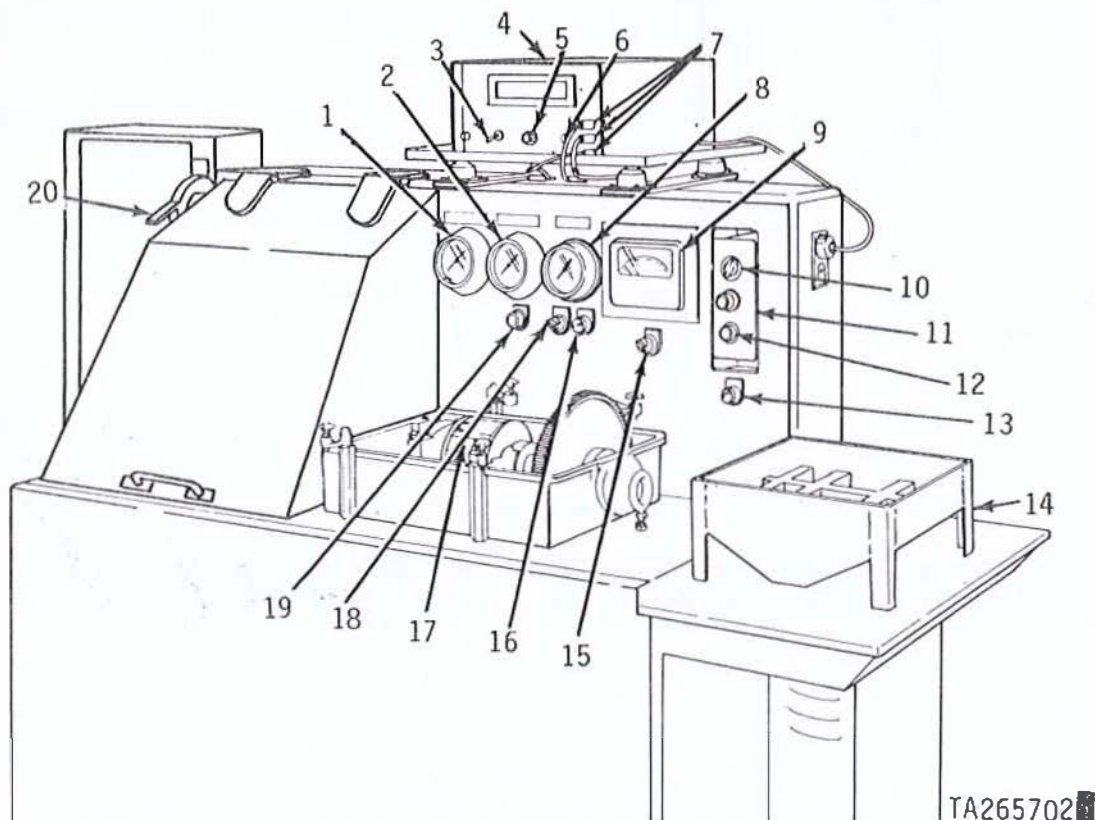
Test stand and advance assembly with coupling guard and housing cover removed.
